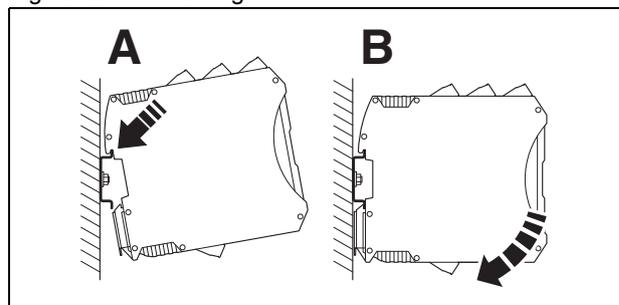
Tilting the ME MAX... housing onto the DIN rail connector with power connector
